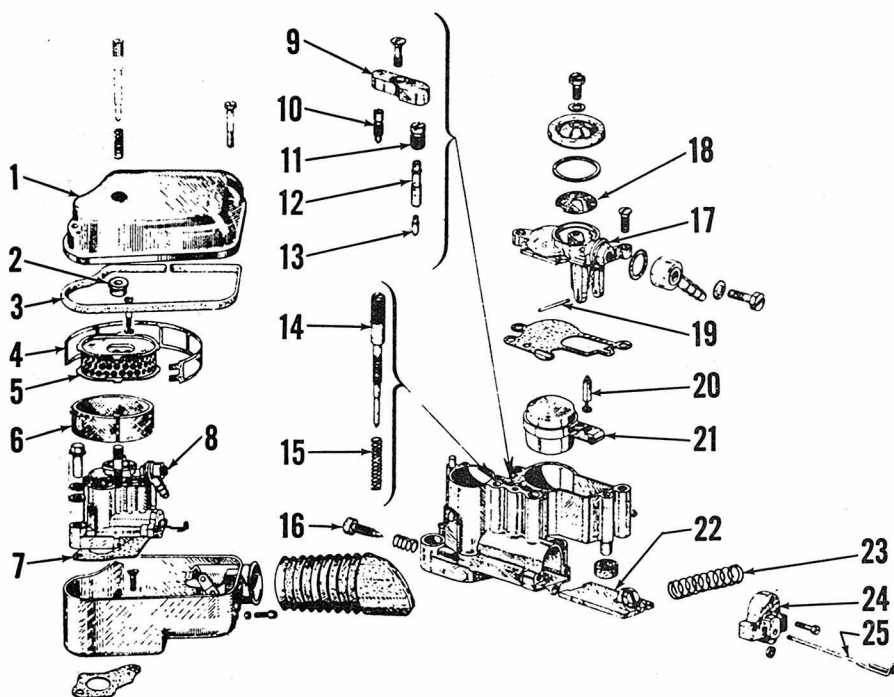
Carburetor and air cleaner typical of all models.
